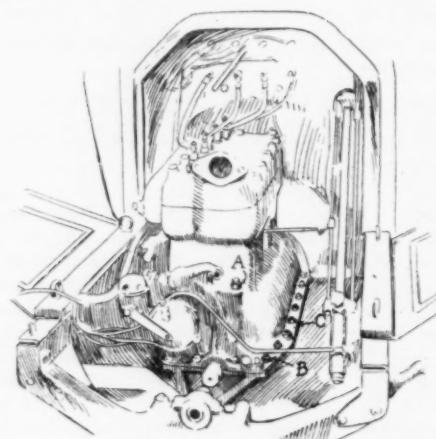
Bolts that must be removed to install the Splitdorf mounting bracket
